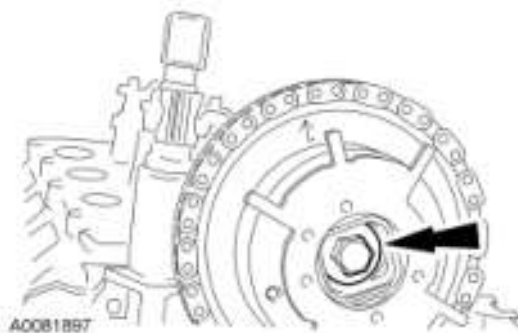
Identifying Camshaft Phaser And Sprocket Assembly Bolt
